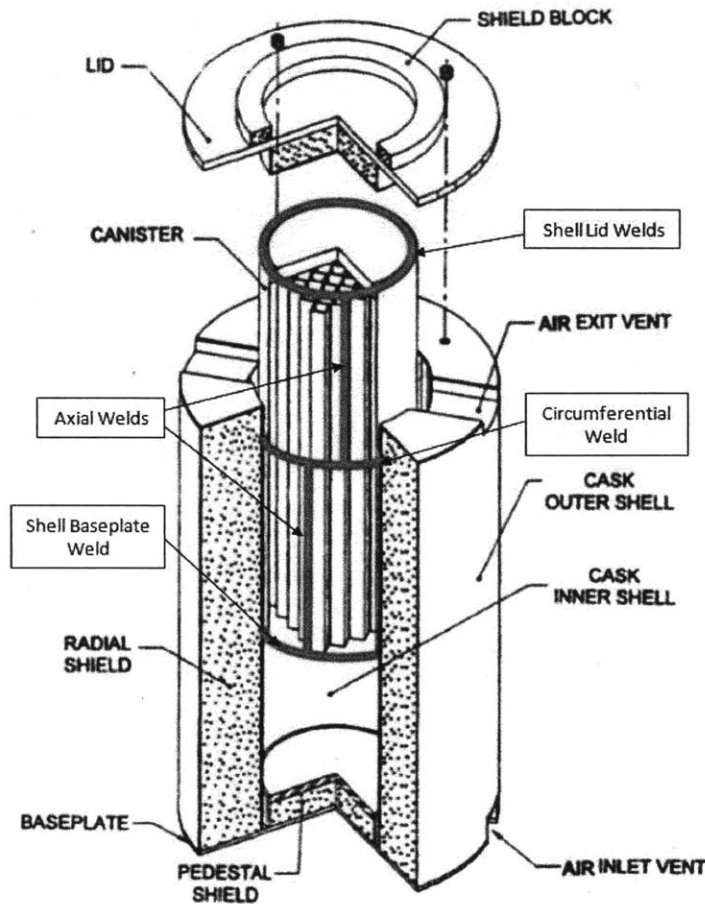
Weld Locations on One Side of a Holtec MPC within a HI-STORM 100 overpack
